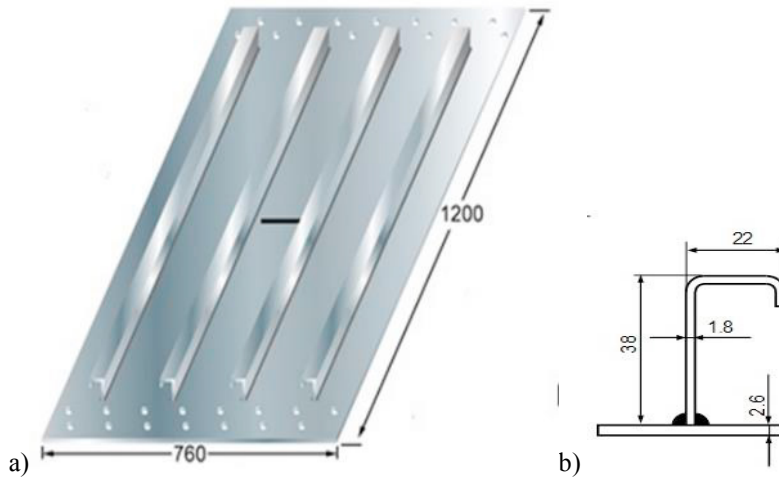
a) Stringer panel, b) details of welded joint
